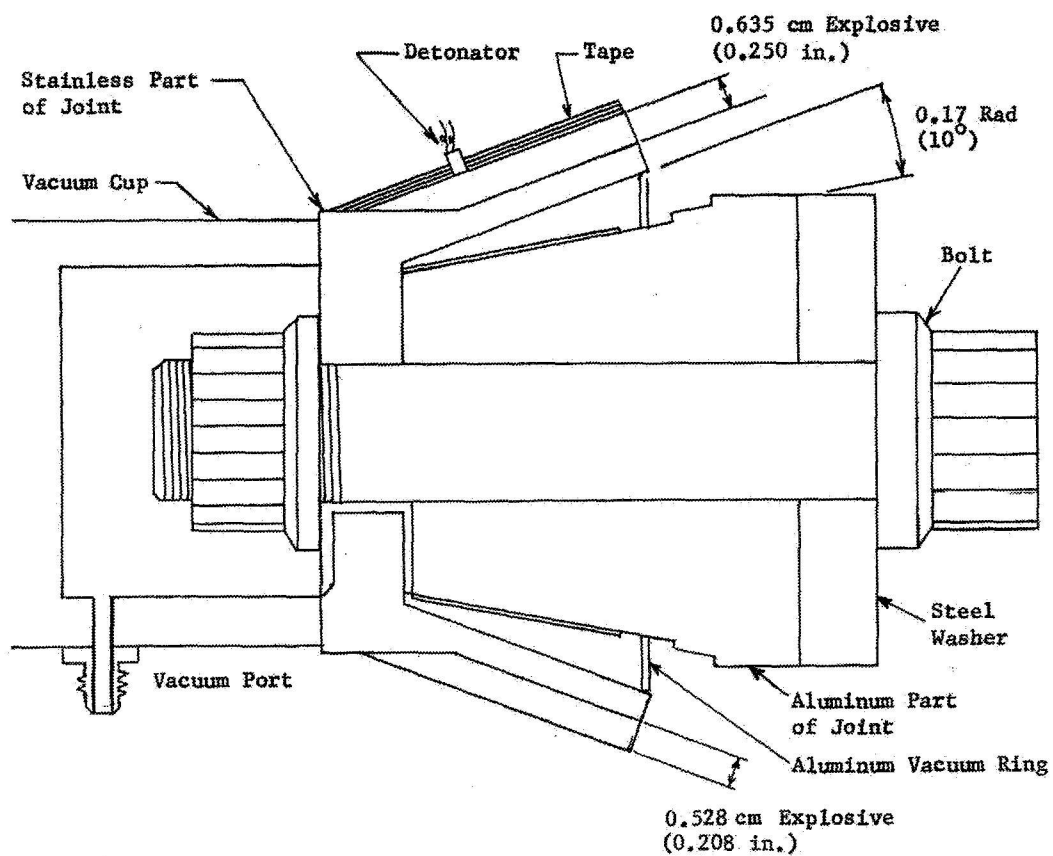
Setup for Explosive Bond Joint Production Stainless to Silver/Aluminum
